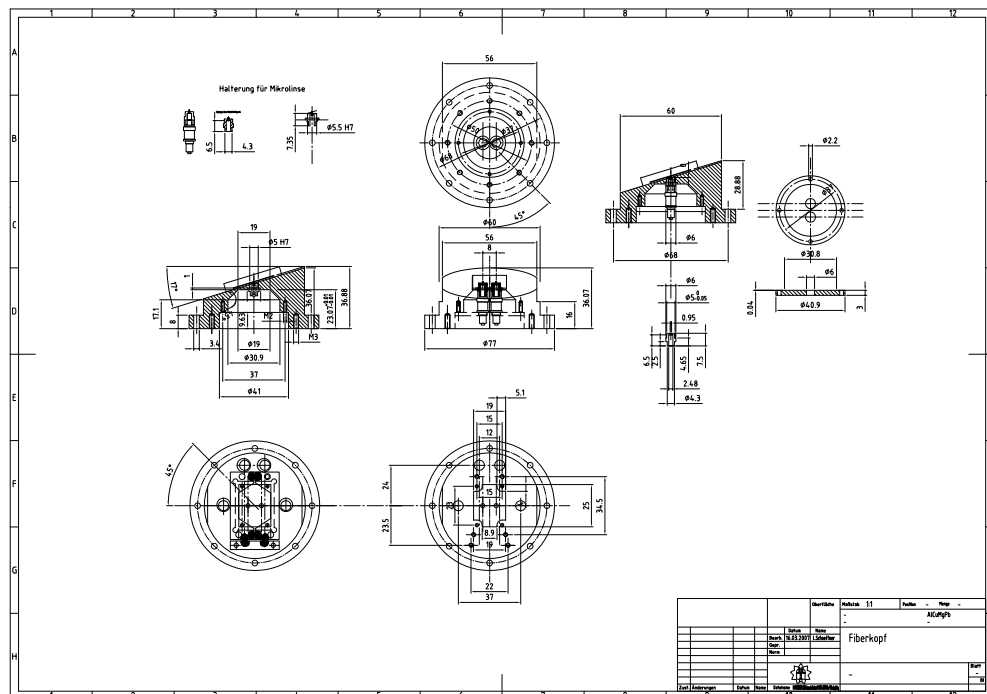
Construction drawing of the top cap of the fiber head that hold the fiber ends.
